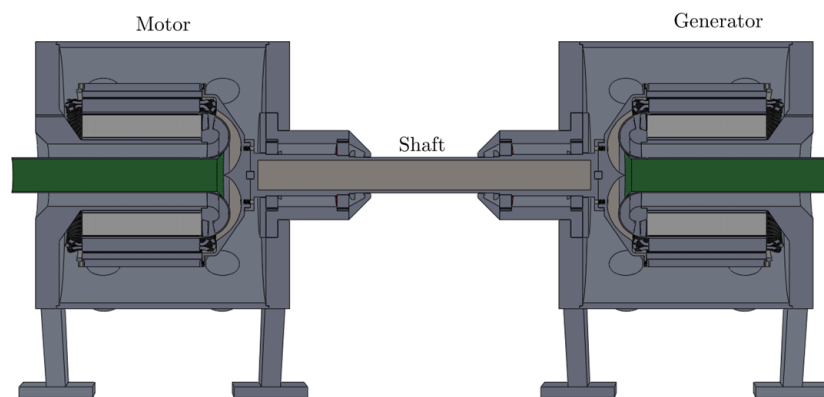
Full demonstrator layout provided courtesy of Yuankang Chen.
